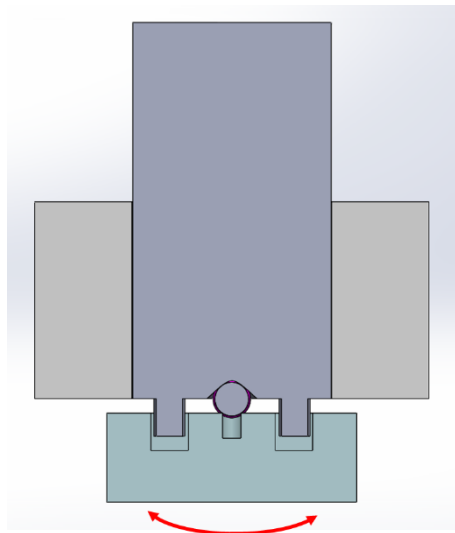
Cross-section View of the Rotating Shaft and Rotor Pad Assembly
